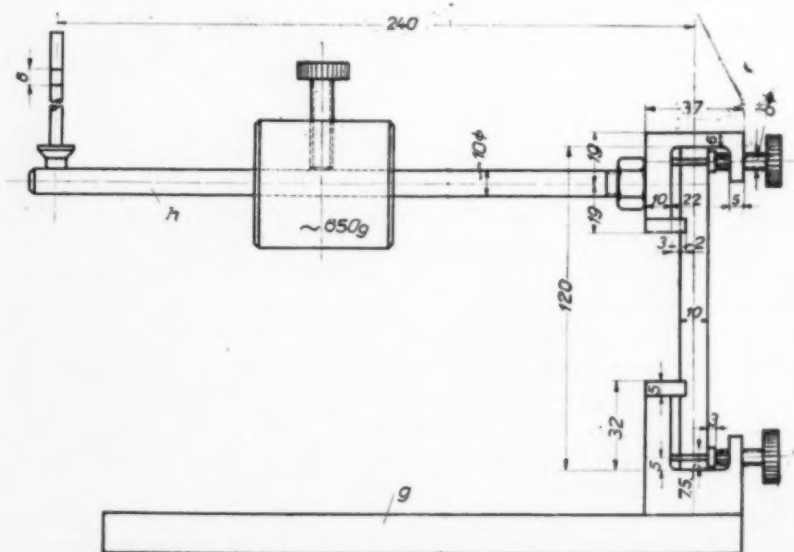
Side elevational view showing dimensions and details of standard apparatus
